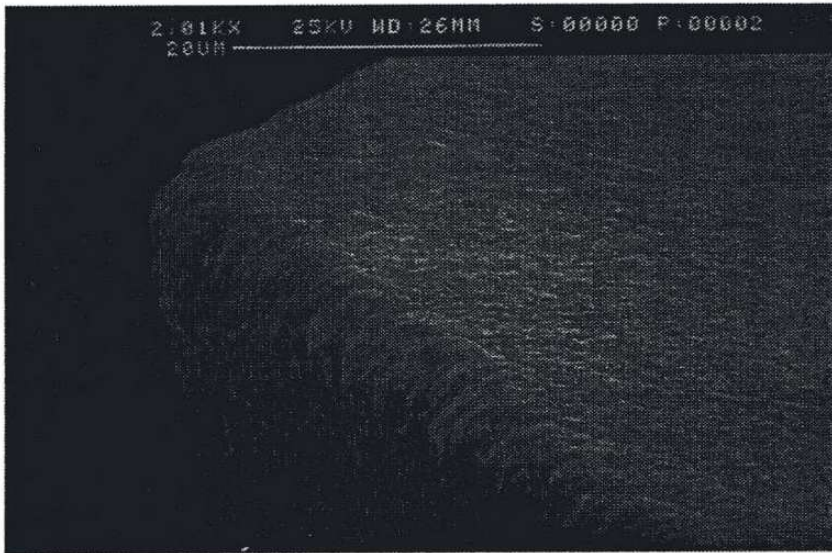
A Drill Produced by Faure [52] with an Interlayer and a Diamond Coating Before Testing
